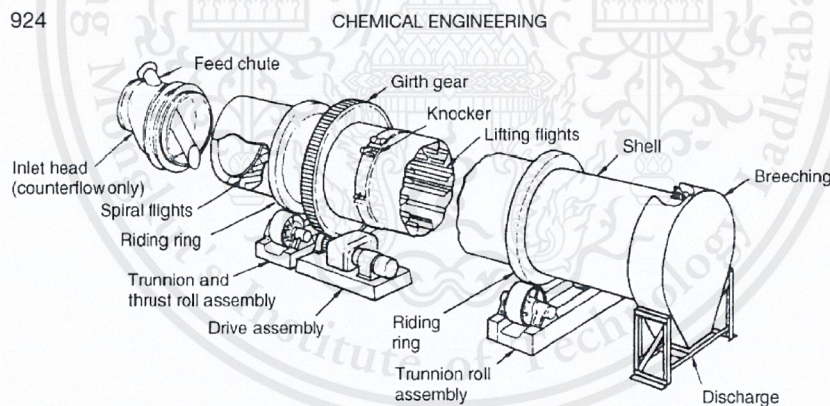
Configuration of Rotary Dryer [Baeyens, J., 2012]
